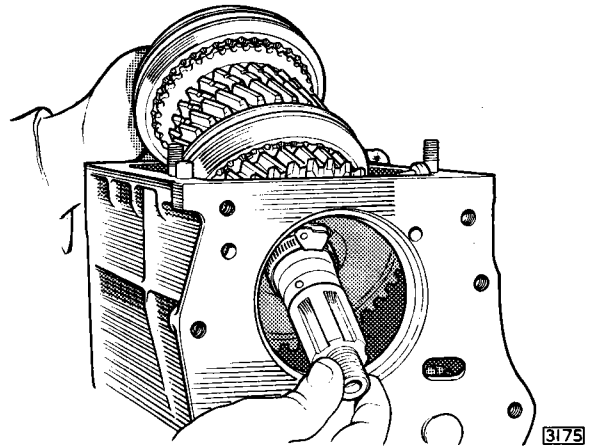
Removal of the mainshaft. Note the hose clamp fitted to retain reverse gear
